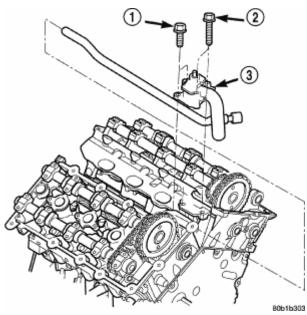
Identifying Water Outlet Connector Courtesy of CHRYSLER LLC
